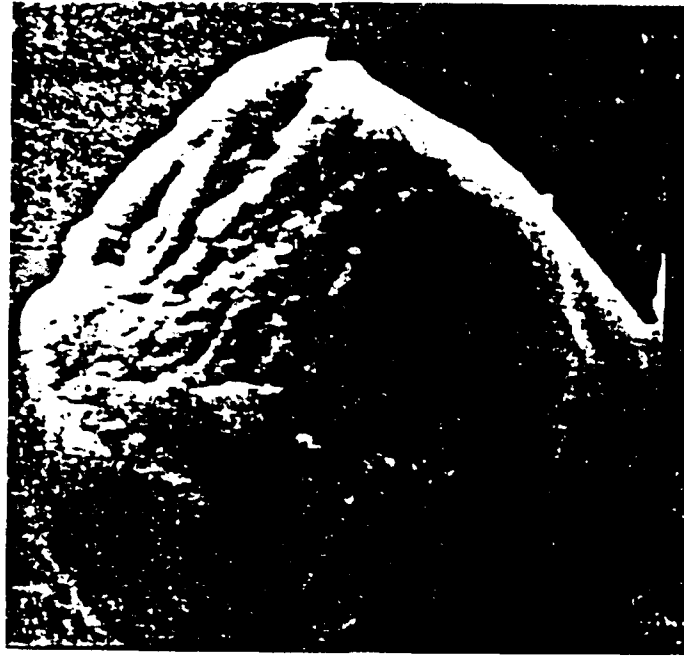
Fracture Surface of Two Group 7 Wires
